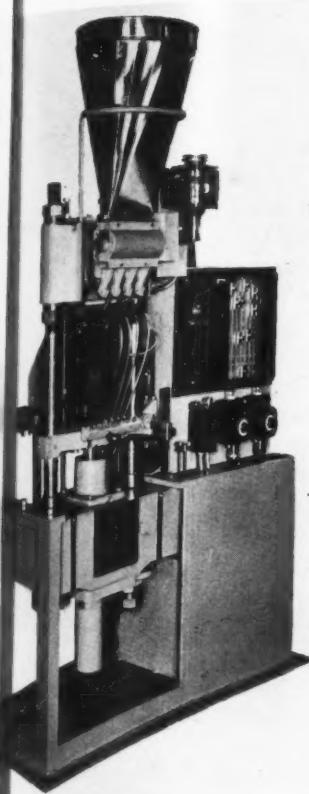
Molding press produces plastic parts without requiring operator attention unless a faulty molding is produced
